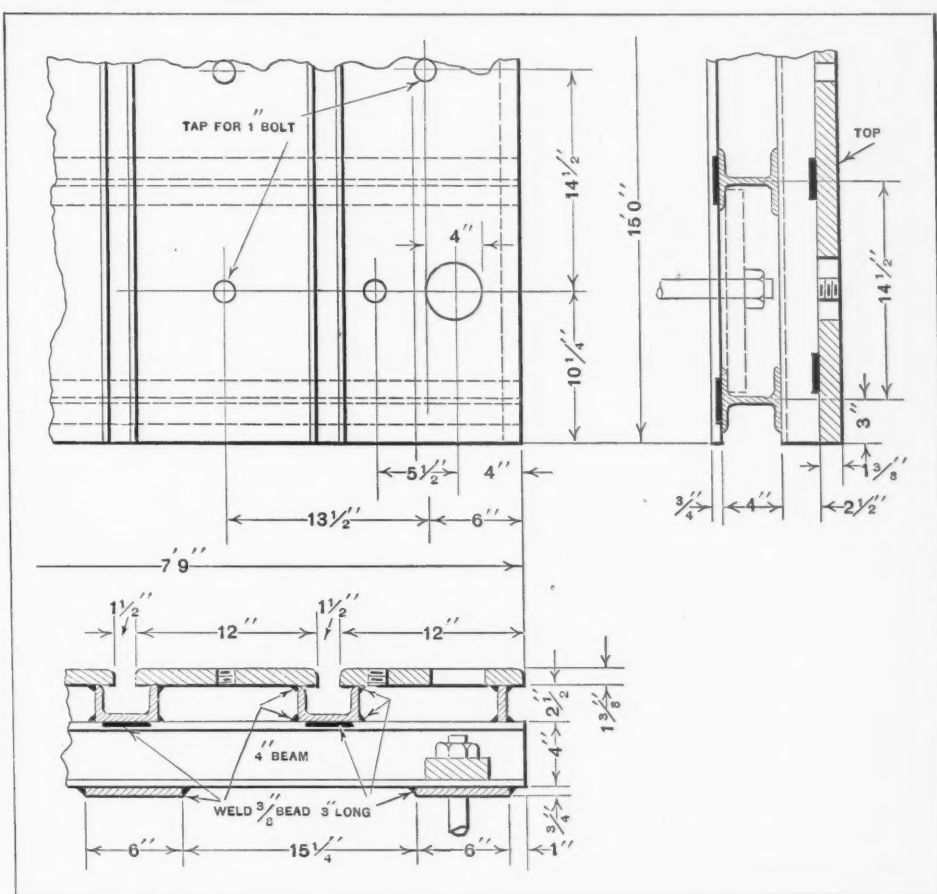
Construction Details of Improved Type of Arc-welded Floor Plate
